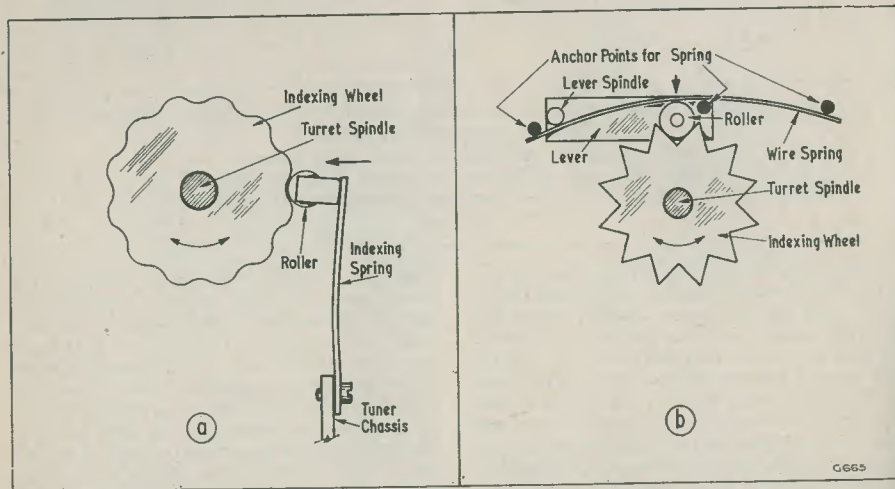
Two types of turret indexing mechanisms. That shown in (a) is usually employed when the turret coils are fitted in a drum. The mechanism of (b) is used in tuners where the coils are mounted radially on a flat disc
